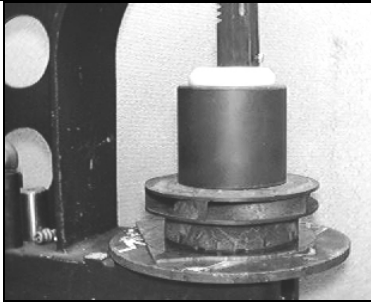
Use PT0737 tool to press inner magnet assembly onto impeller
